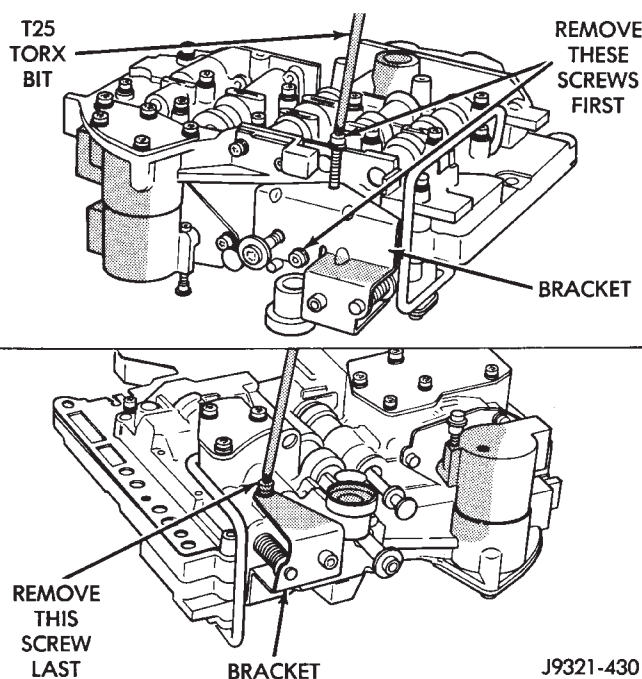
Removing/Installing Adjusting Screw Bracket Fasteners
